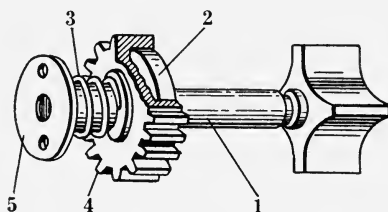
Assembler Star Shaft Assembly. The steel shaft holding the star is indicated at 1; 2 is the brass friction disk screwed upon the shaft 1; 4 is the pinion which meshes with an intermediate gear from which it receives its motion. The pinion fits over the brass disk 2 and is not supported by the shaft 1; 5 is the nut screwed upon the end of the shaft 1; a spring 3 is placed between the nut 5 and the pinion 4 so that, in the case of an overset matrix line, the star will stop, the spring permitting the pinion 4 to continue revolving by slipping against the brass disk 2, which, with the star upon the shaft 1 is held stationary, until the obstructing matrix has been lifted from the assembling elevator.
